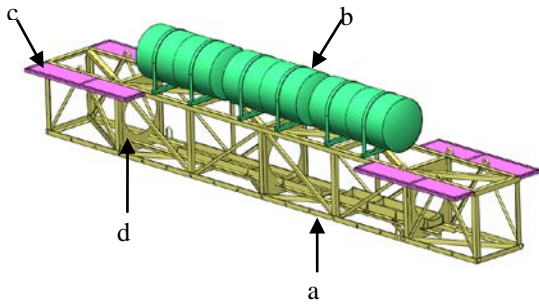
UUV launching mechanism: a) holder structure of UUV b) buoyancy vessels c) rotational drag plates d) horizontal drag plates
